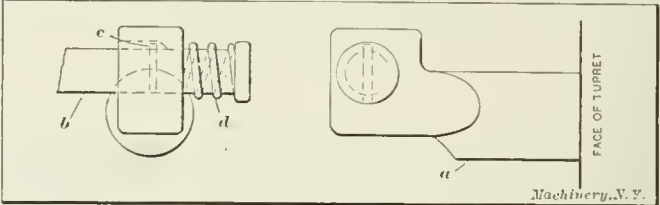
Tool and Holder used in Shaving the Piece shown at C in Fig. 1
